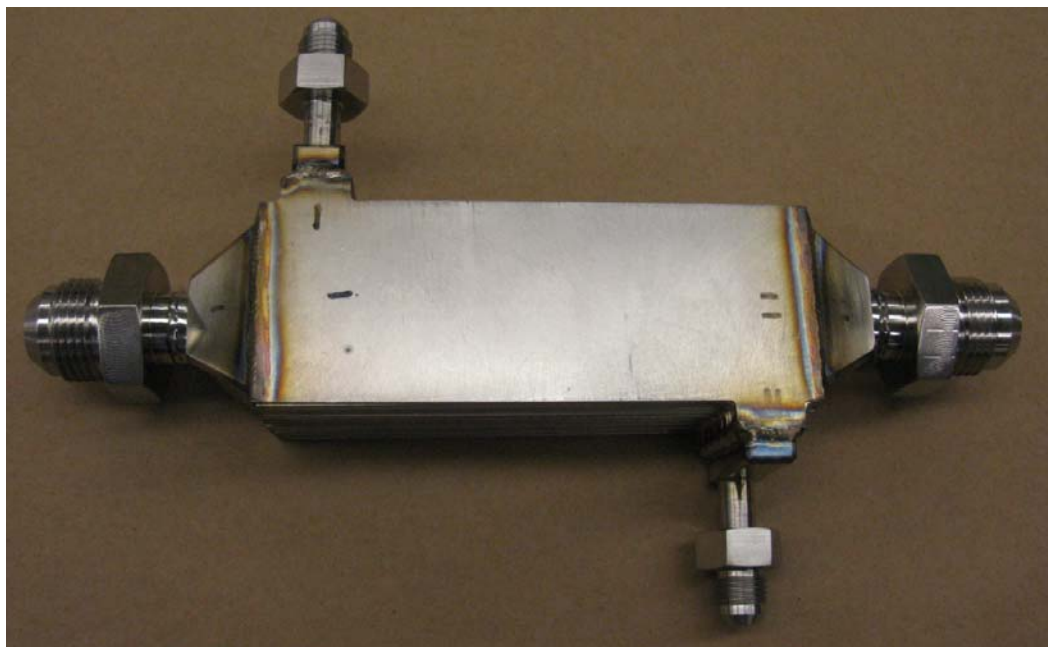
Brazed and welded PLSS heat exchanger
